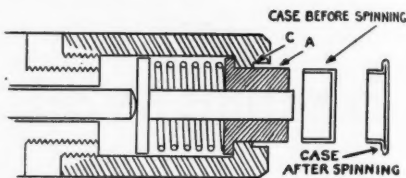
Ejector rod through spindle forces nose out when piece is finished.
